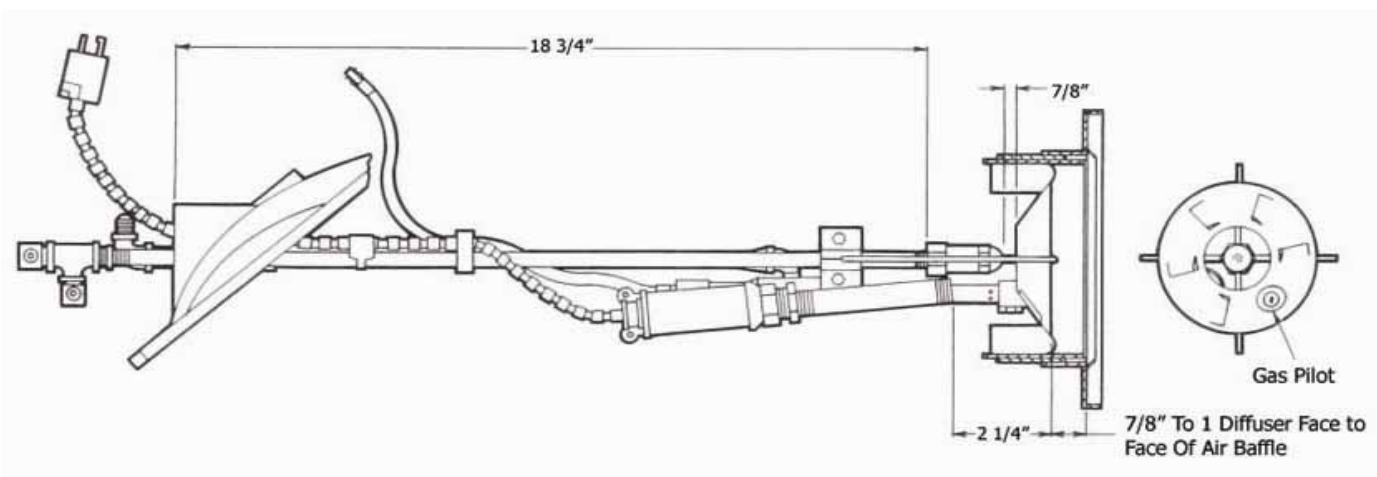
FPLG 14, 17, & 20 Drawer Dimensions
